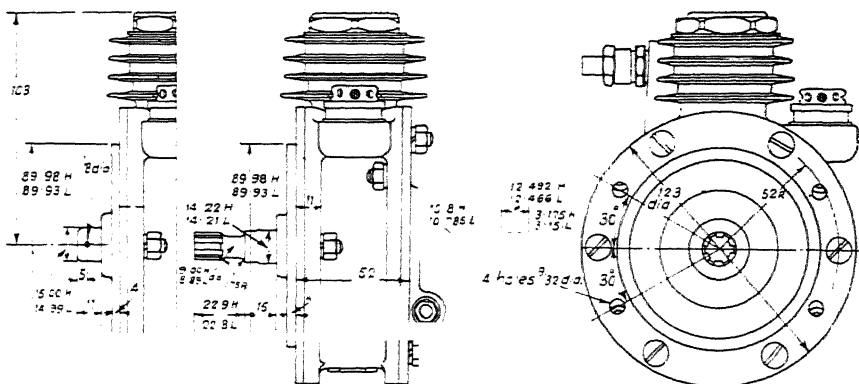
DIMENSIONS OF AV COMPRESSOR
